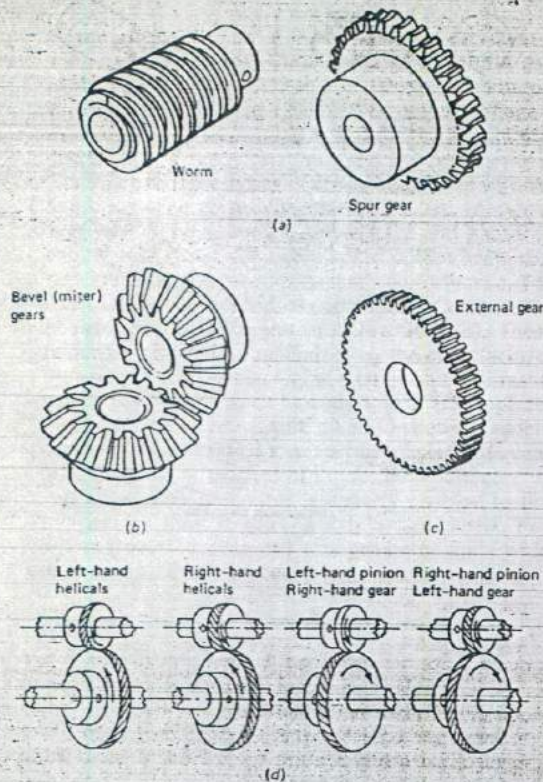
Typical servo gears. (a) Worm gears. (b) Bevel (miter) gears. (c) External gear. (d) Helical gears.
